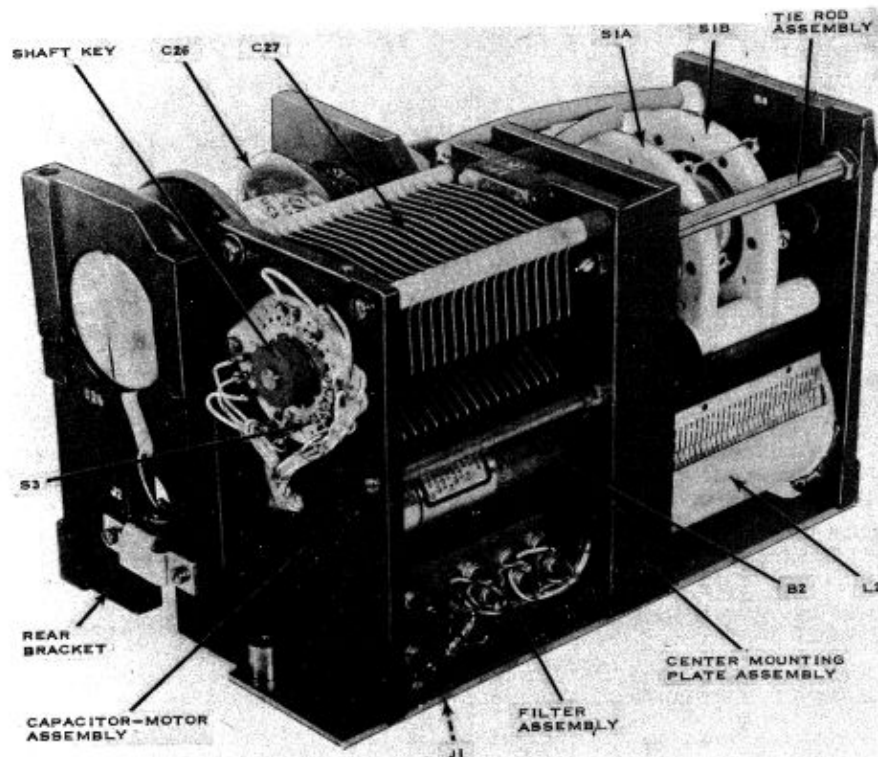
ANTENNA COUPLER ASSEMBLY 2A3, COMPONENT LOCATION, REAR OBLIQUE VIEW
